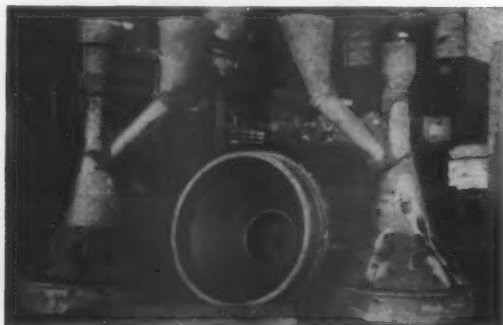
FUNNEL CASTINGS OF 85-5-5-5 RED BRASS, TOP POURED WITH INDIRECT-FILLED HEAD ON LARGE SOLID SIDE TUBE.
